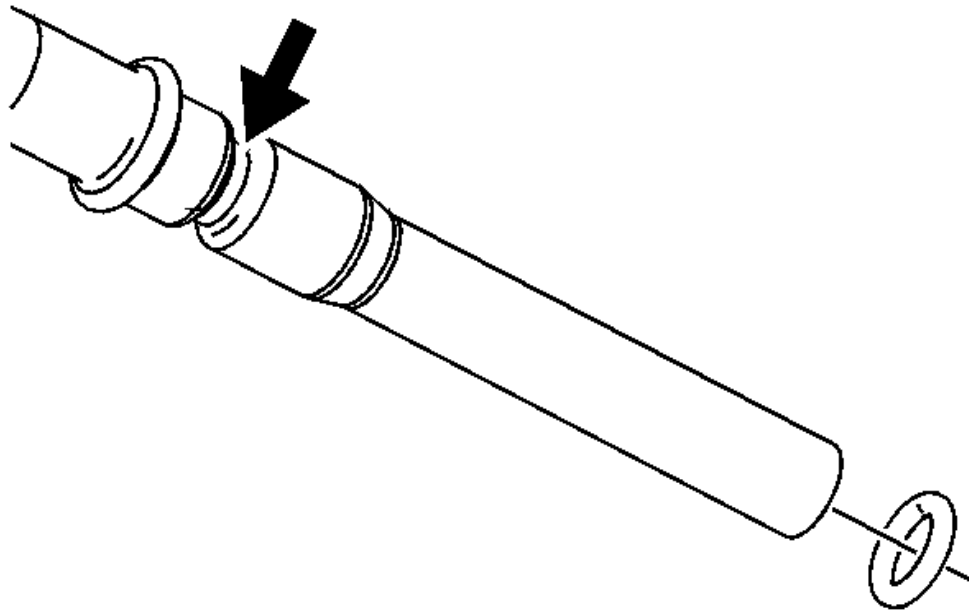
View Of Oil Level Indicator Tube O-Ring
